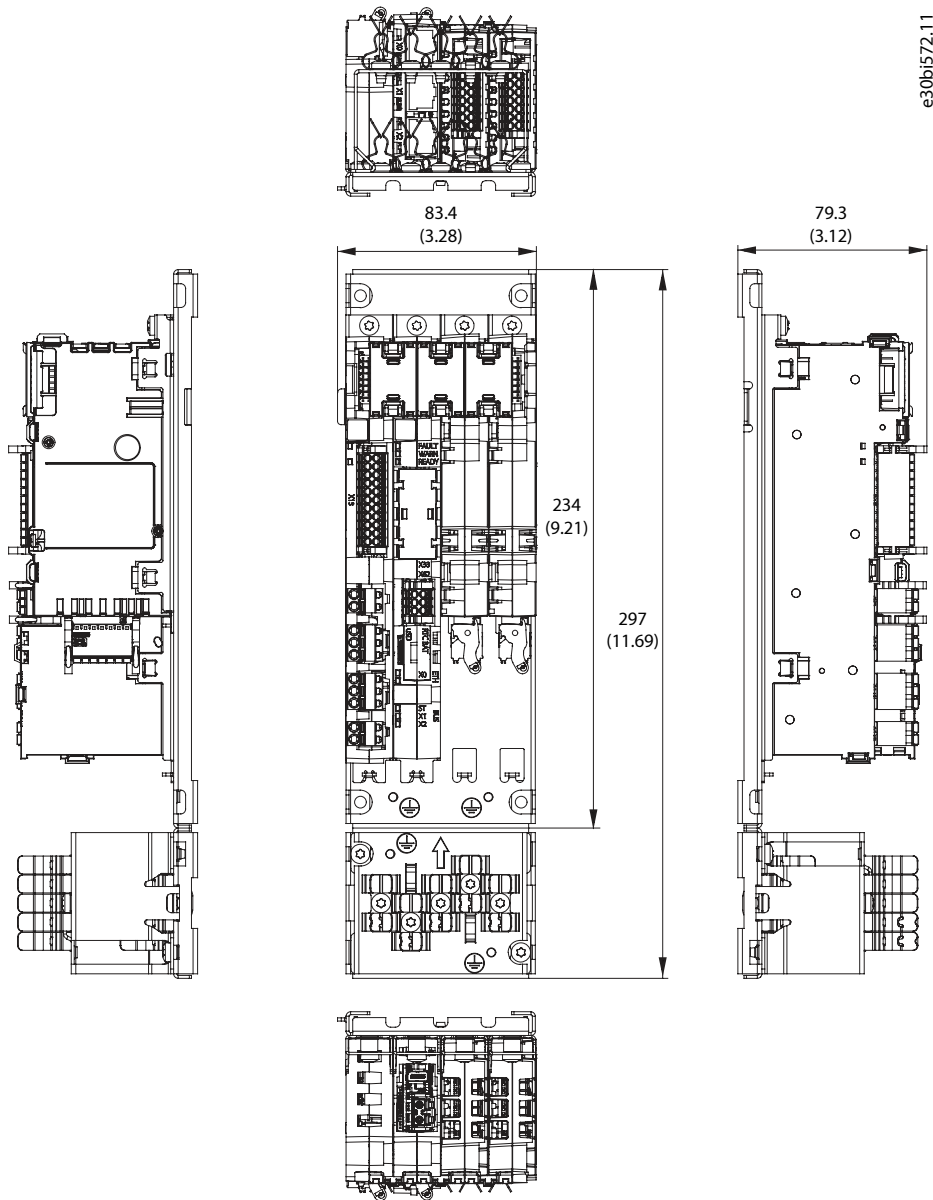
Dimensions of the Control Unit in mm (in), Example Configuration
